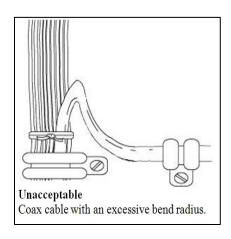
Example of unacceptable coaxial bend radius.
